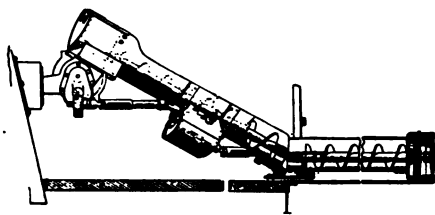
Outline of the Crosby Stoker and Conveyor.
